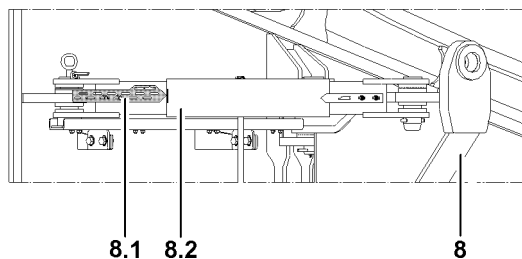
Adjustment of adjustment sleeves for lifting the complete crawler carrier
